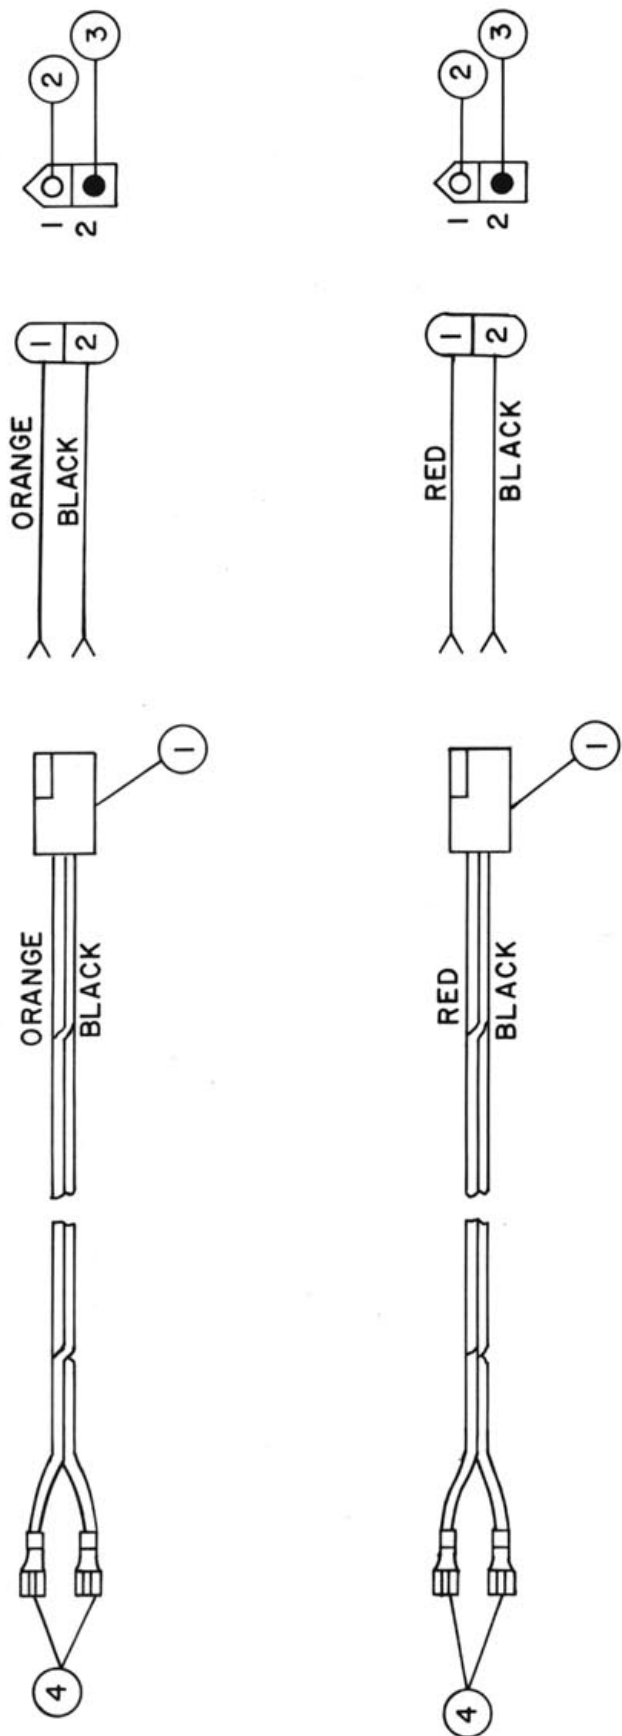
Cable Assemblies 063016 (Top) and 062786 (Bottom)
